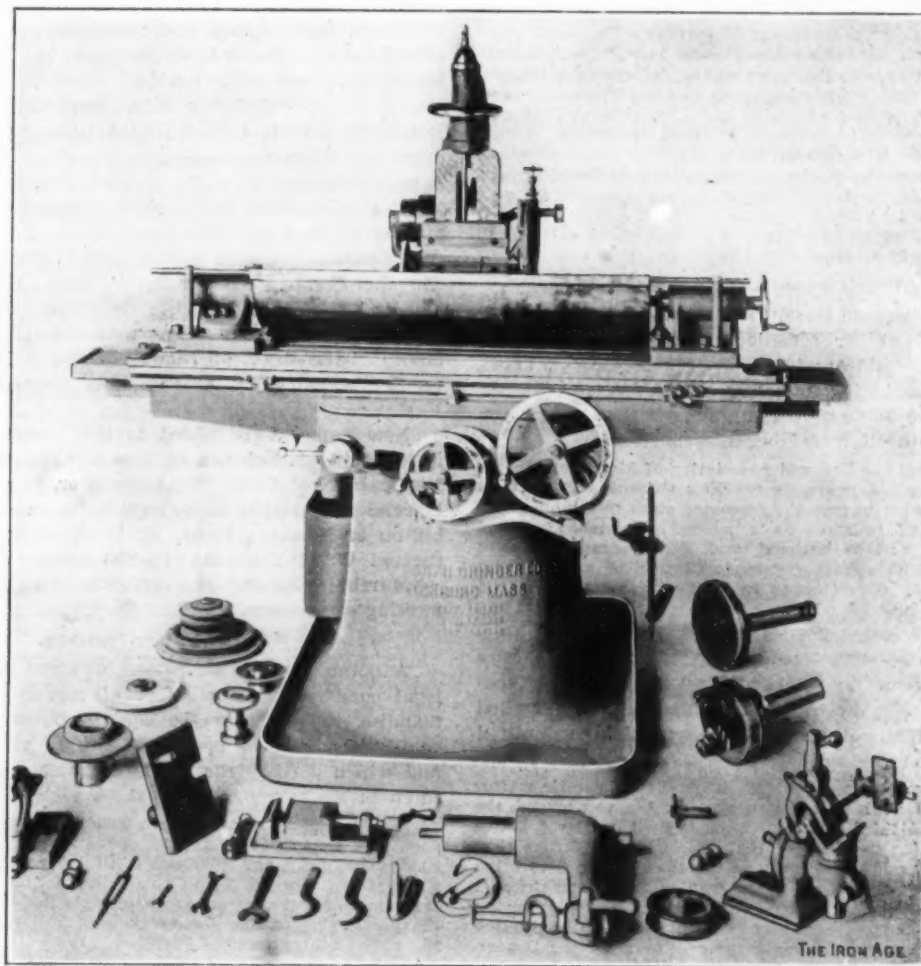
The Improved No. 2½ Universal Surface Grinder Built by the Bath Grinder Company, Fitchburg, Mass.
